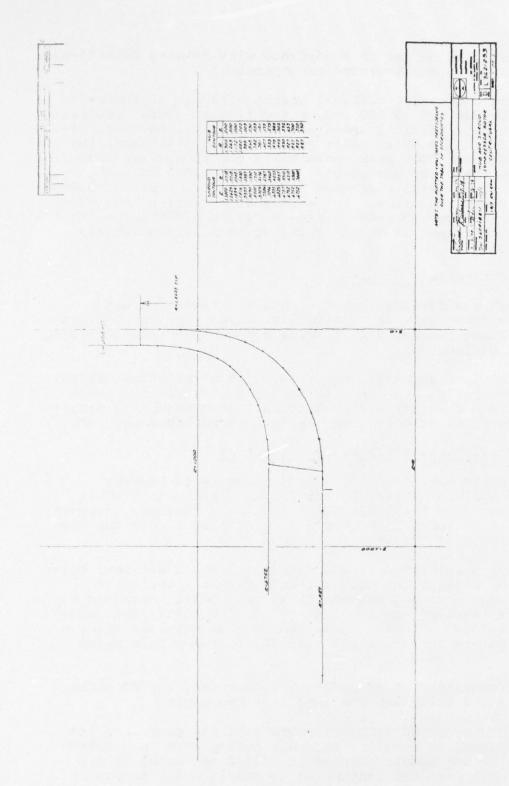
Centrifugal Compressor Rotor Hub and Shroud Contours (Drawing No. L3621233)
